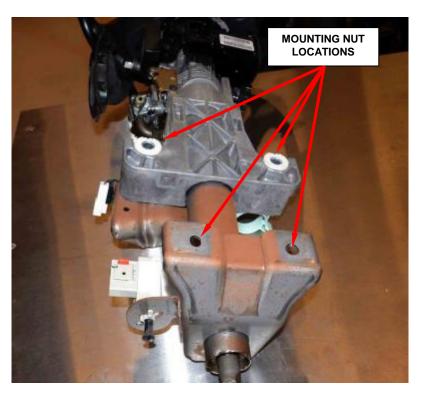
Steering Column Mounting (Column Removed for Photographic Purposes)
